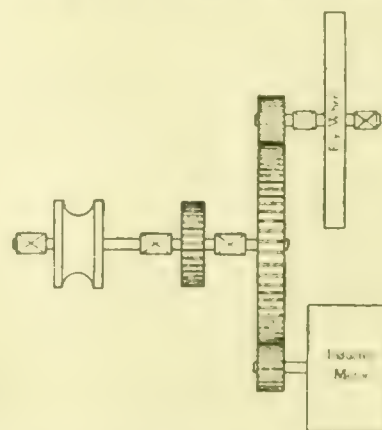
PLAN OF MOTOR AND FLYWHEELS ON WELDING ROLLS.
